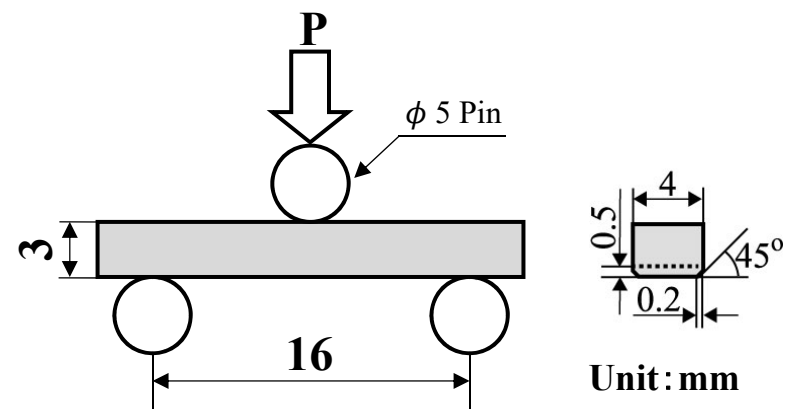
Schematic drawing of the three-point loading system, test specimen size, and machining configuration.
